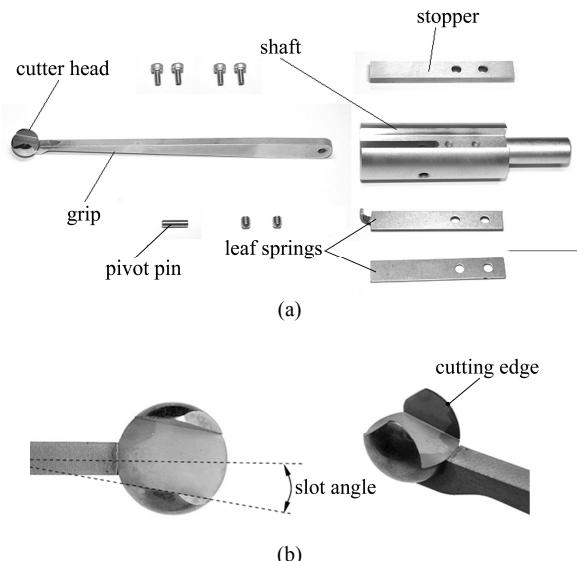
The third design of the deburring tool [10]: (a) components, (b) cutter head with slot angle and cutting edge.
